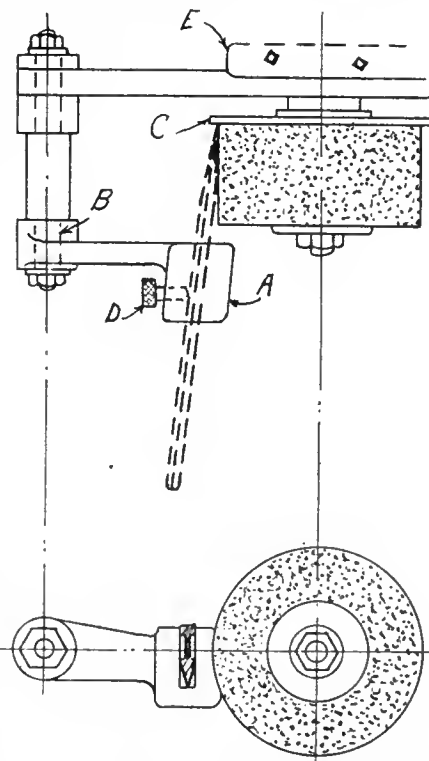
SWING FIXTURE FOR GRINDING POINT.
